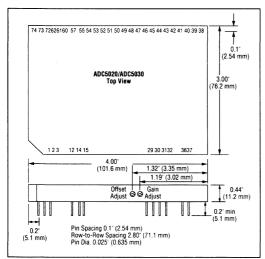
ADC5020/ADC5030 Outline Drawing & Pinouts.
